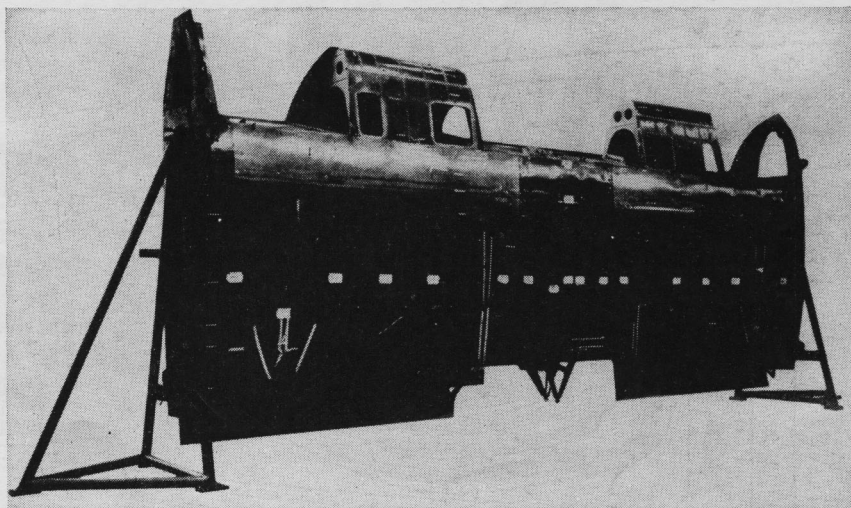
The full cantilever wing is built in three sections: an untapered center section and two outer panels with detachable tips. The center section (shown) runs through the fuselage just below the cabin floor. Three spars are utilized in this section, with engine nacelles and landing gear fittings attaching to the fore spar. Note the aileron control hinge fitting at lower center, flanked by inboard flap hinges.
